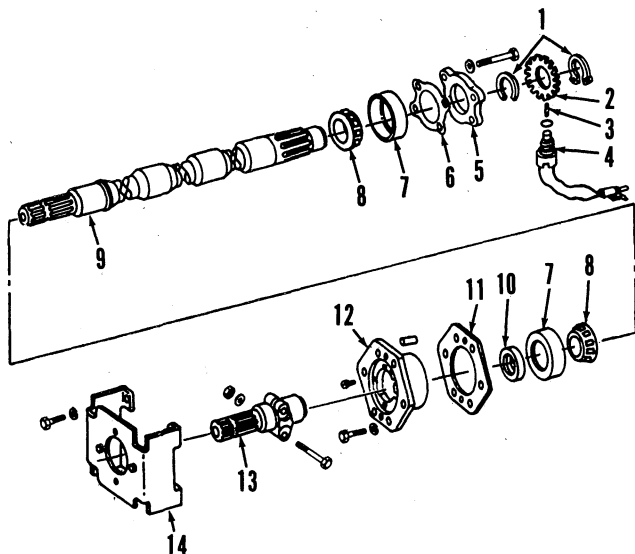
Exploded view of single-speed pto output shaft and associated parts used on Models 4650 and 4850 equipped with Power Shift transmission.
